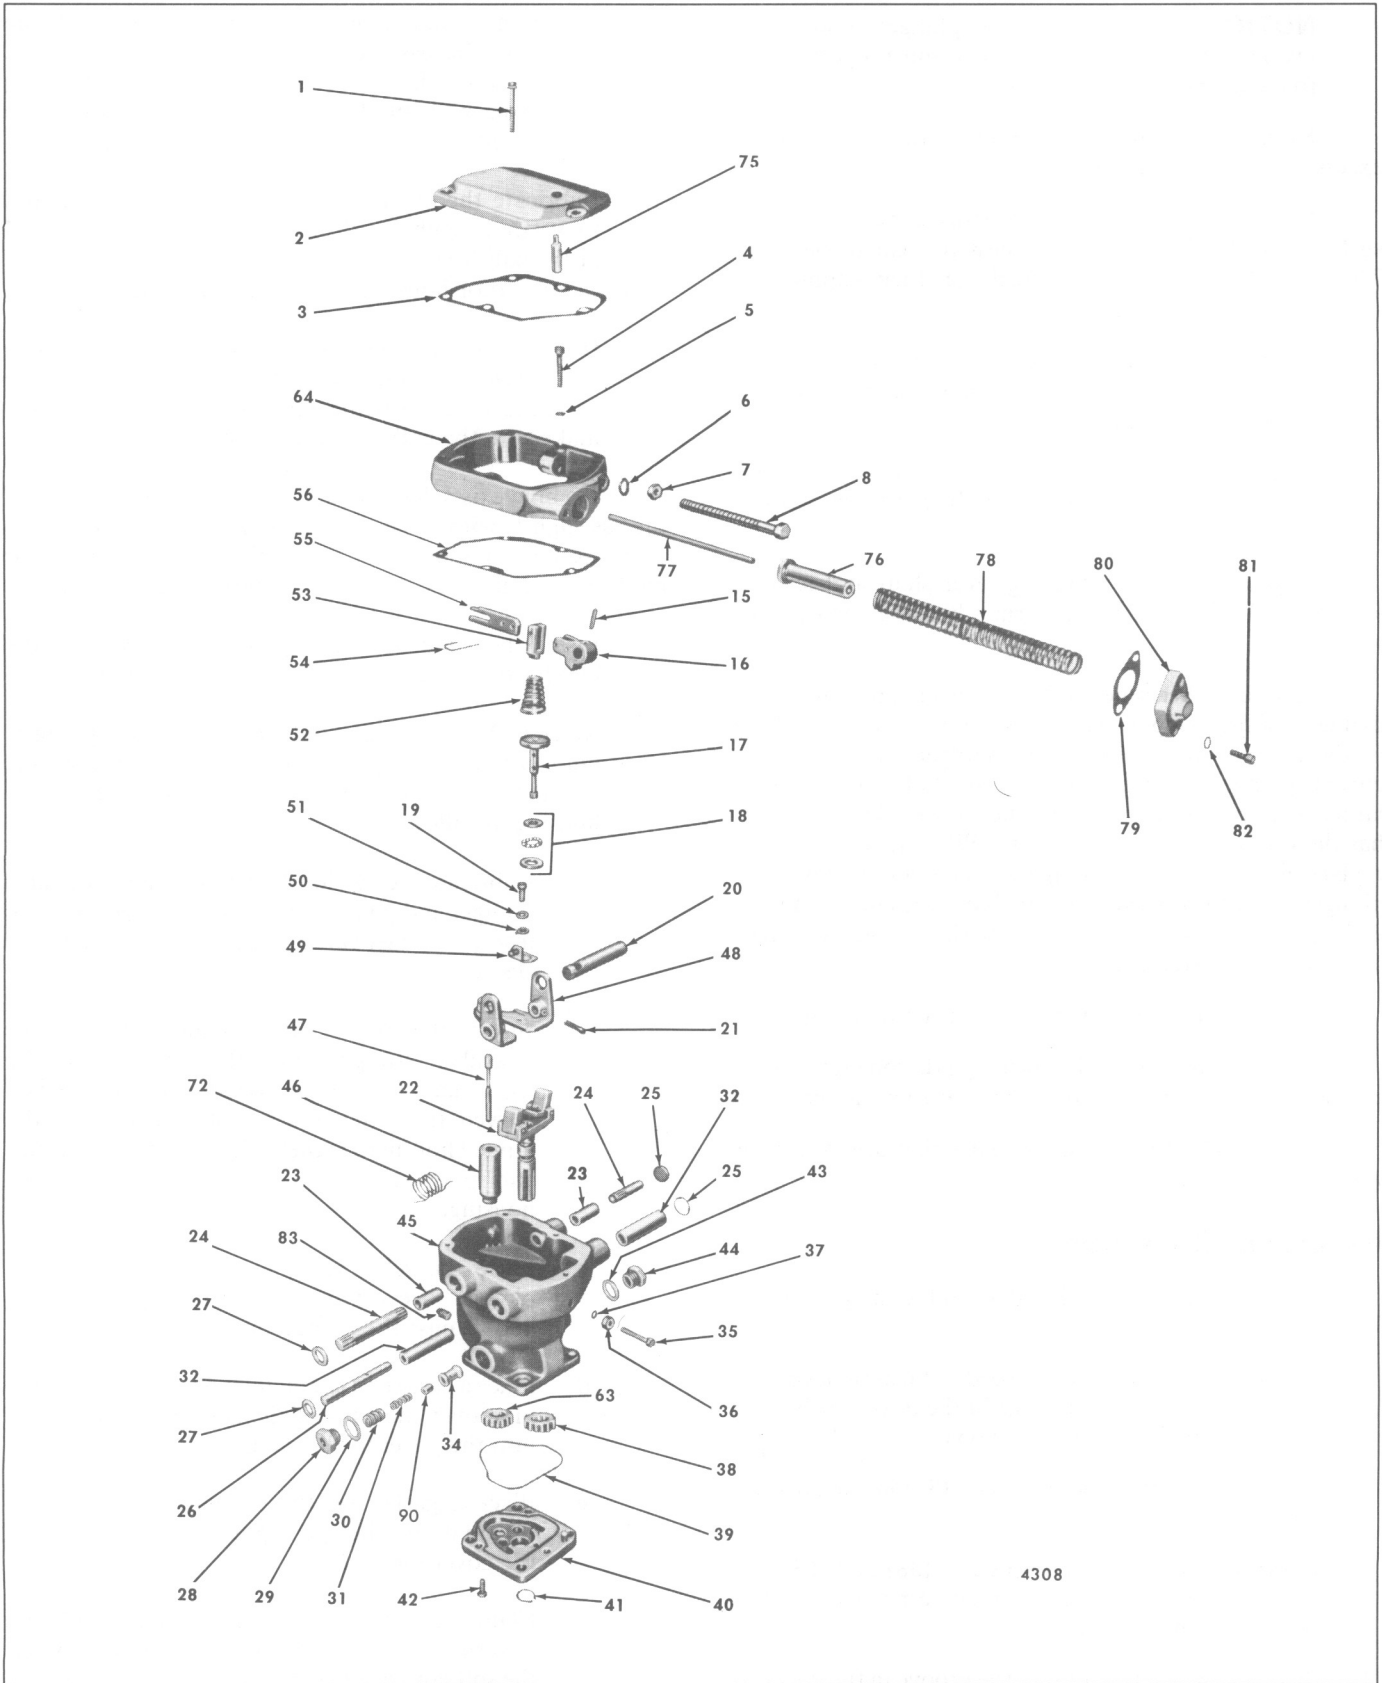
Hydraulic Governor Details and Relative Location of Parts
